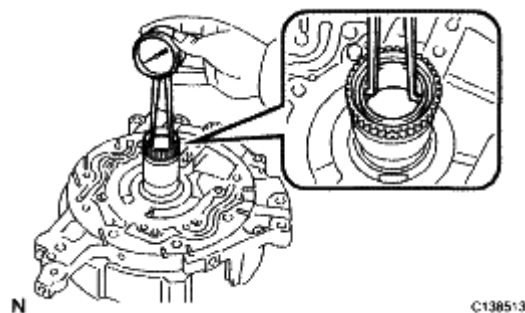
Measuring Inside Diameter Of Oil Pump Body Bushing
